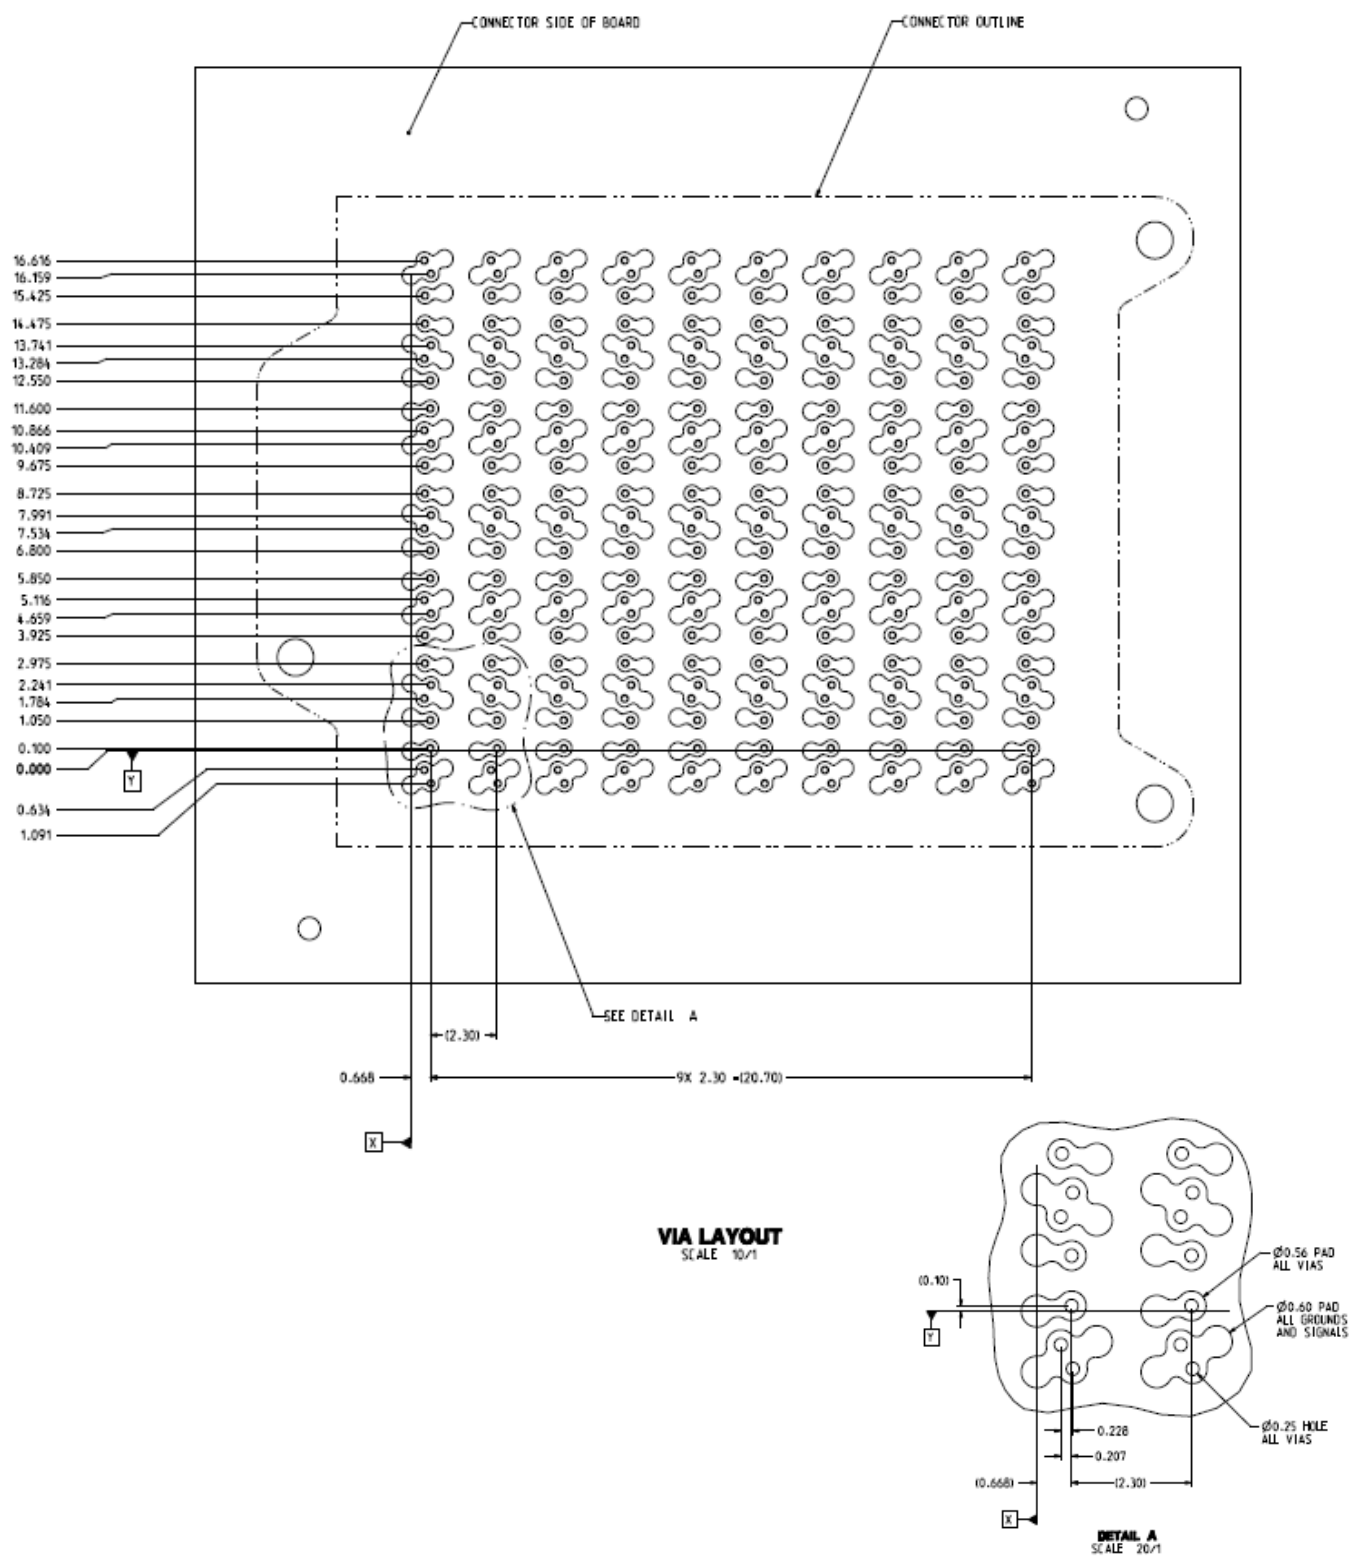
InfinX Detailed Board Layout – (4-Pair Plug is shown)
